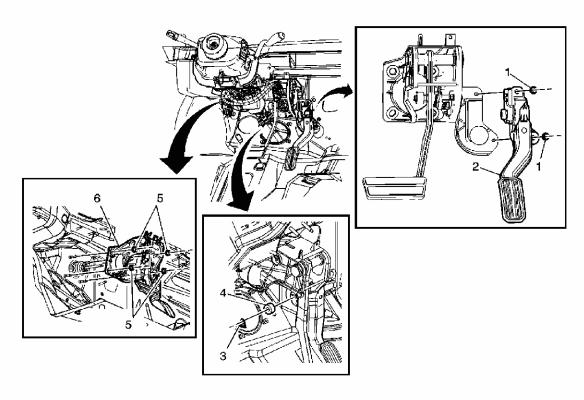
Replacing Brake Pedal Assembly Courtesy of GENERAL MOTORS CORP.
